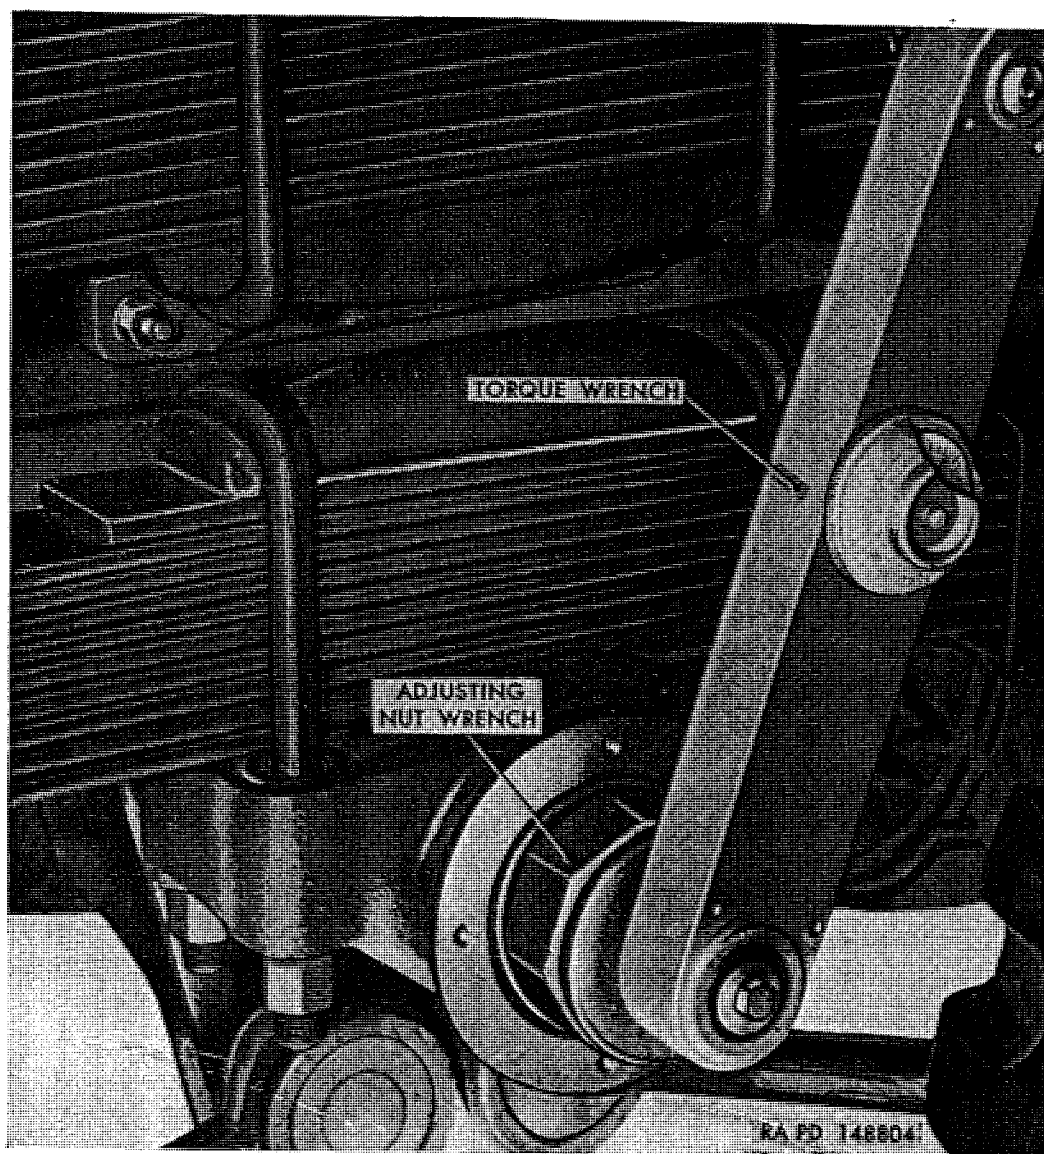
Tighten spring seat adjusting nut, using wrench B7950946 with torque wrench.
